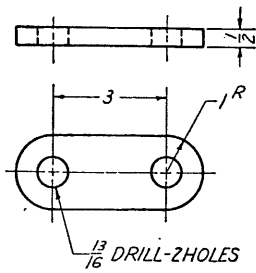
Dimensioning a Piece with Rounded Ends.
